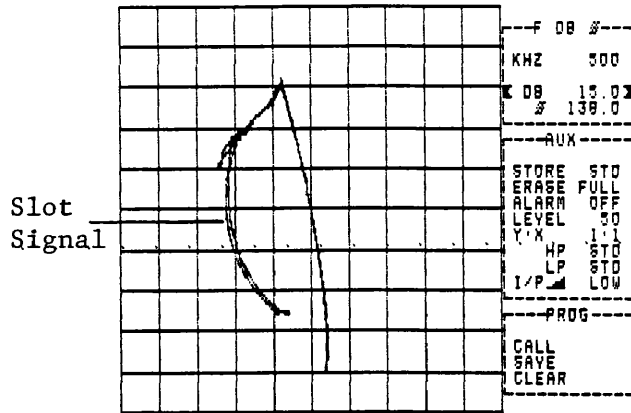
Ferrite-cored Horizontal Coil - Scan over 5 mm Deep Slot in Stainless Steel Weld Specimen 1
